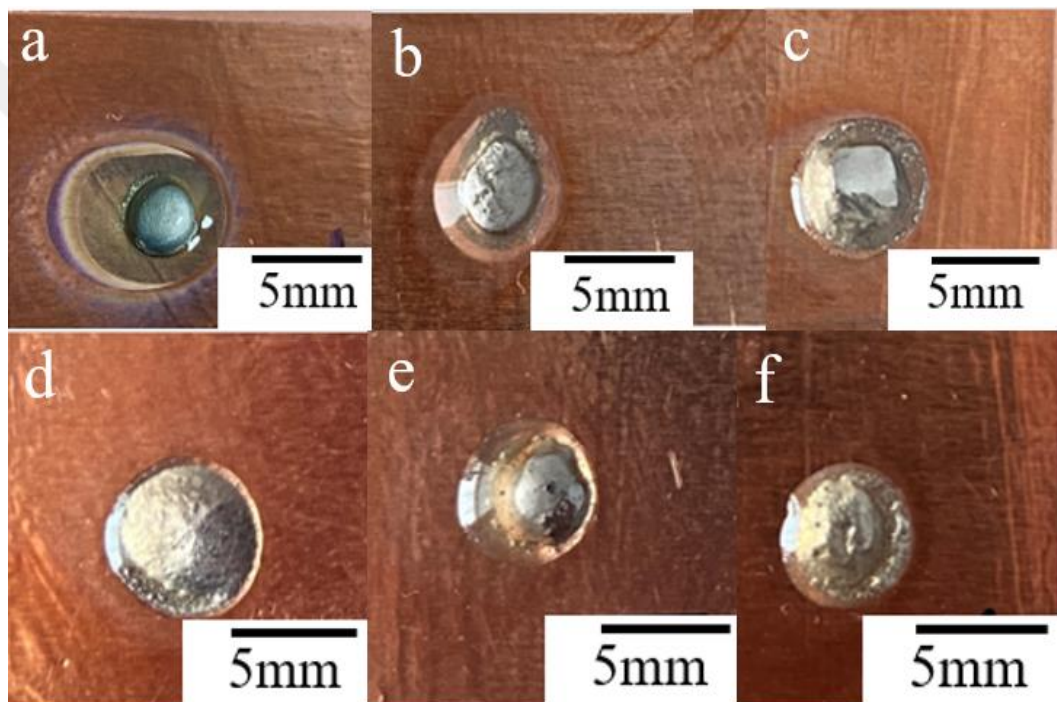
Solder spreading area, (a) Epoxy-free Sn-Bi solder, (b) Sn-58Bi solder containing 1 wt.% epoxy, (c) Sn-58Bi solder containing 3 wt.% epoxy, (d) Sn-58Bi solder containing 5 wt.% epoxy, (e) Sn-58Bi solder containing 7 wt.% epoxy, (f) Sn-58Bi solder containing 9 wt.% epoxy
